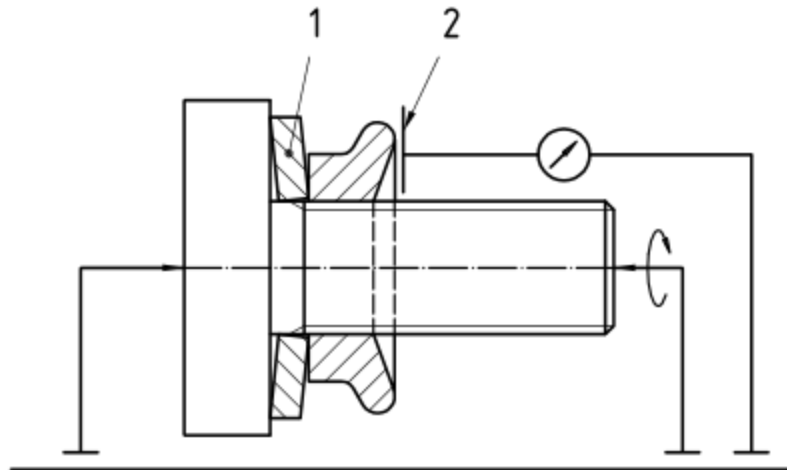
Gauge for verifying position tolerance specified in Figure 77
